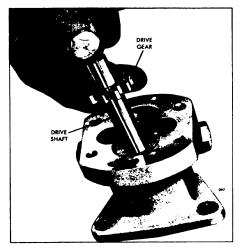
Inserting Fuel Pump Drive Shaft and Gear Assembly through Oil Seals
